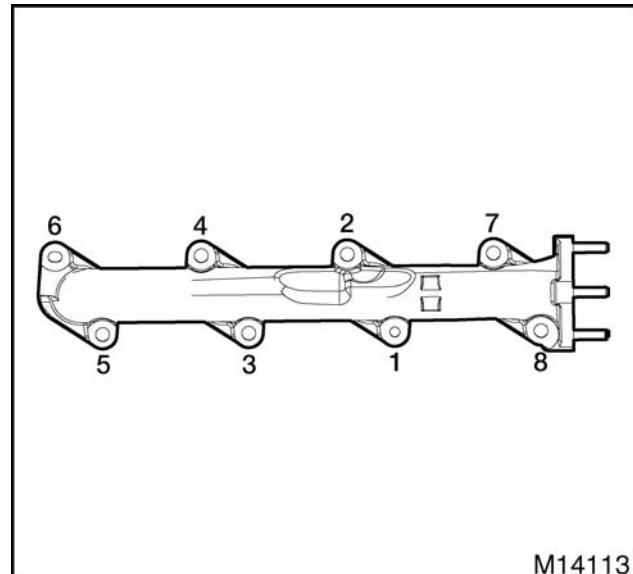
Torque sequence for left exhaust manifold mounting bolts
